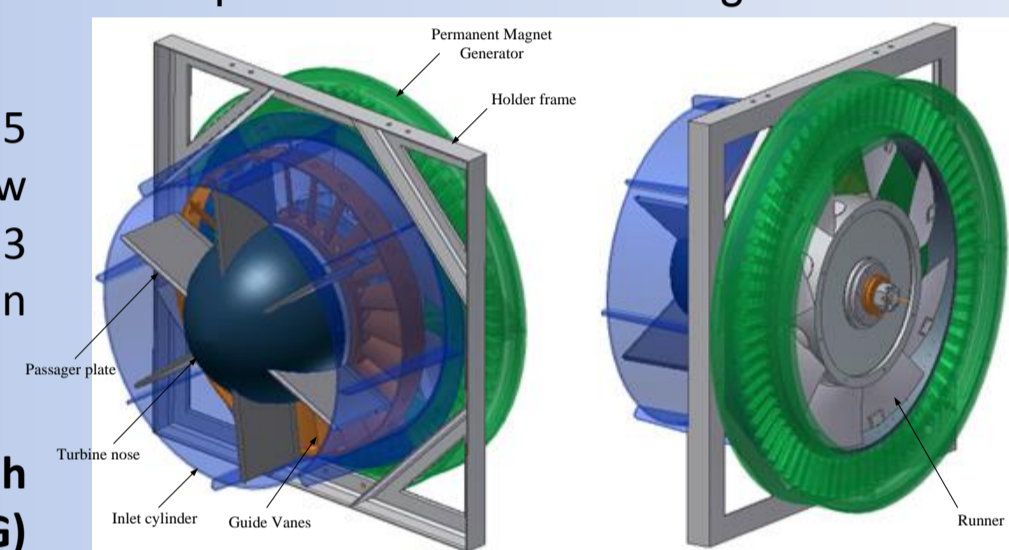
Axial flow Turbine integrated with PMG design assembly
